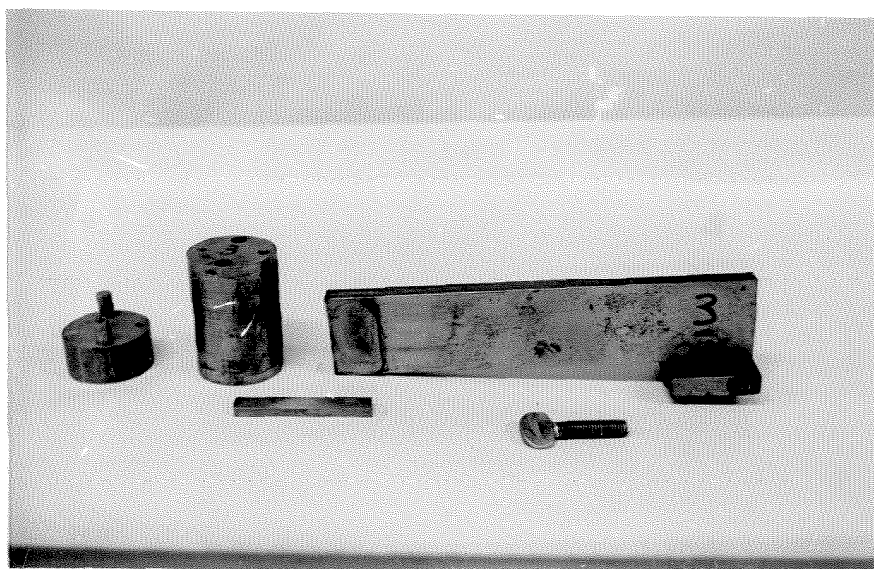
Piston Assembly Components: Spacer Cylinder, Base Cylinder, Clamp Bar, Rectangular Piston, Clamp Bolt, Three-Dimensional Compression Apparatus
